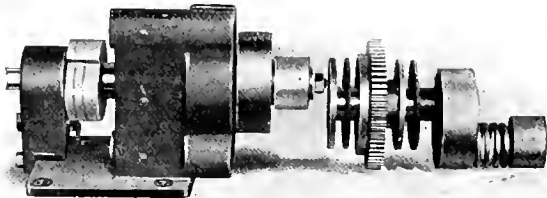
Friction Stop Mechanism for Indexing; shown Assembled and Dismantled
